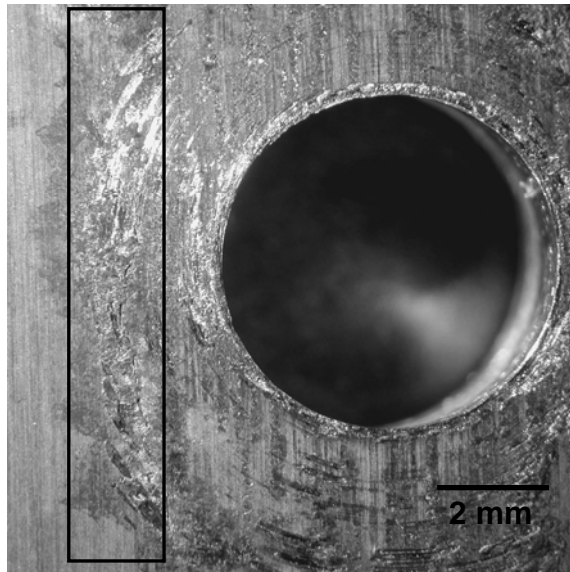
Fretting fatigue cracks on the contact surface after fatigue testing.
